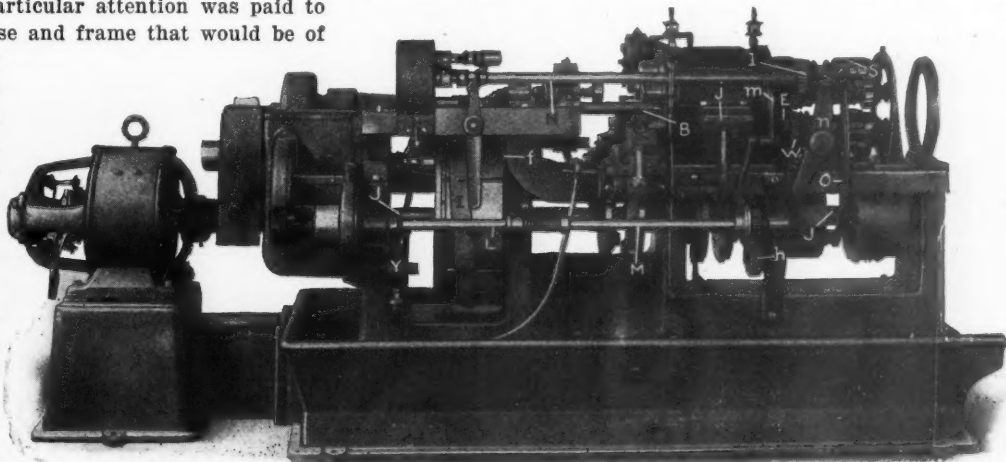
Rear View of Machine equipped with Individual Electric Motor Drive
